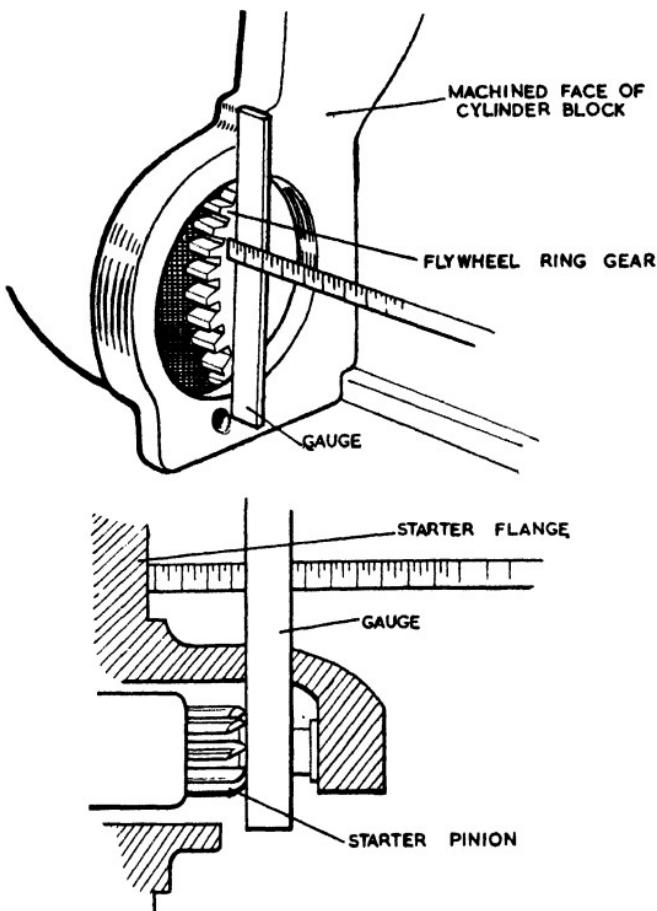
CHECKING FOR STARTER-PINION “OUT-OF-MESH” MEASUREMENT USING GAUGES.
